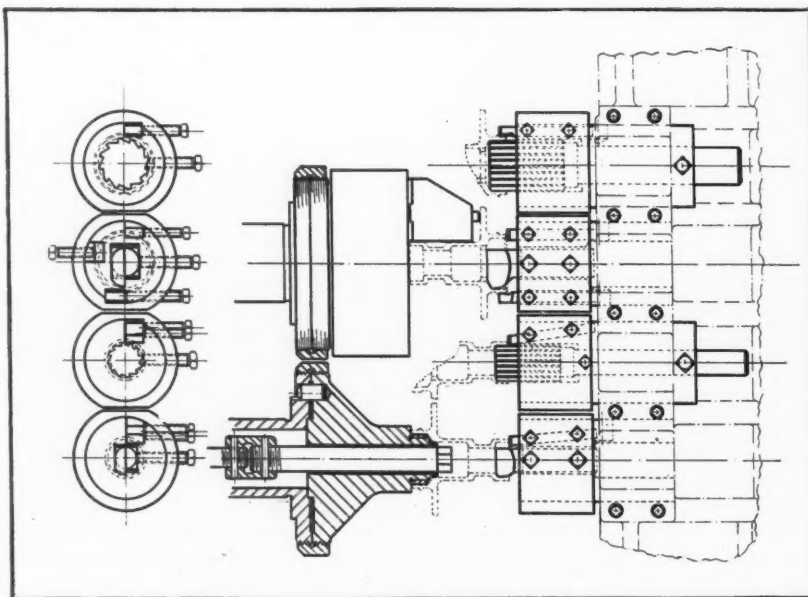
Set-up of Double-spindle Production Lathe for machining the Ball-race Seats of Automobile Front Hubs
